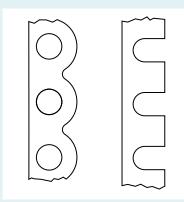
Ears or Slots in Sheet Metal Flanges or Flat Gaskets
